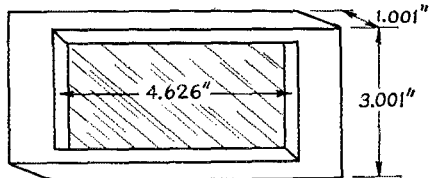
WA6JSA's soldering-iron cleaner and holder.
